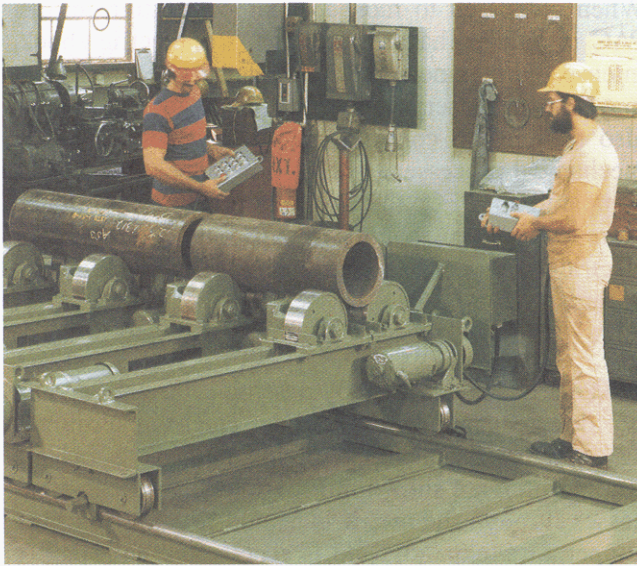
Turning Rolls Used to Rotate Pipe for Welding
